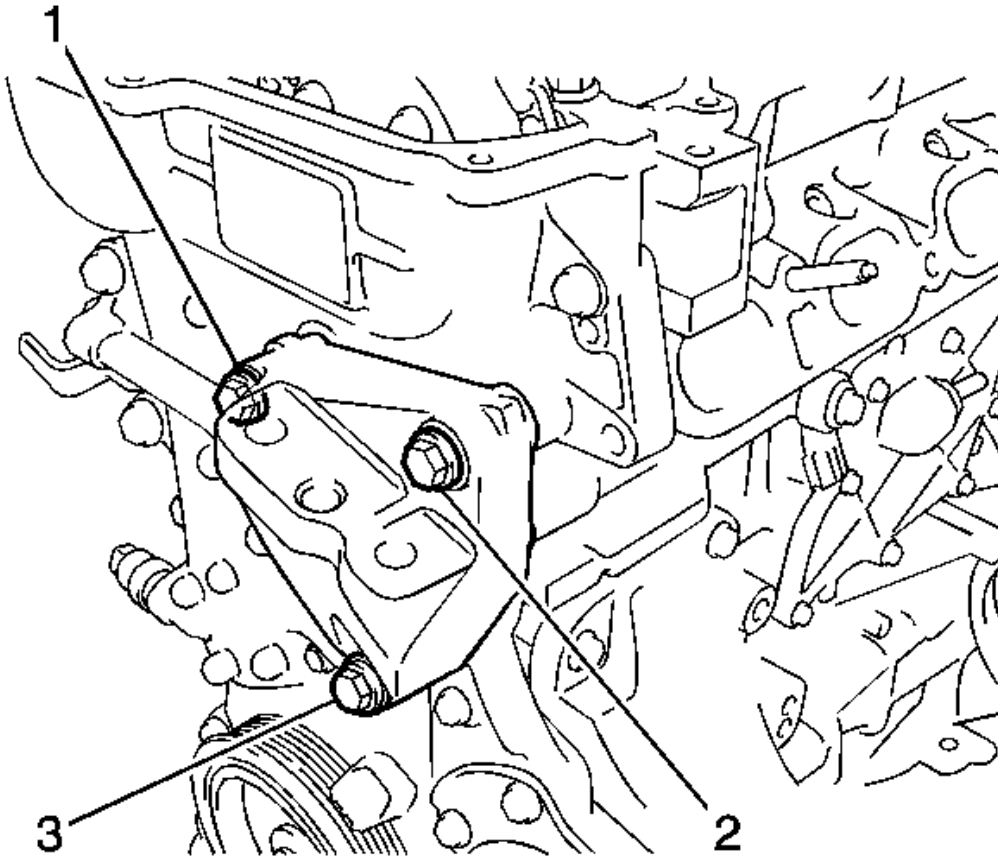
Identifying Engine Mounting Bracket & Bolts
